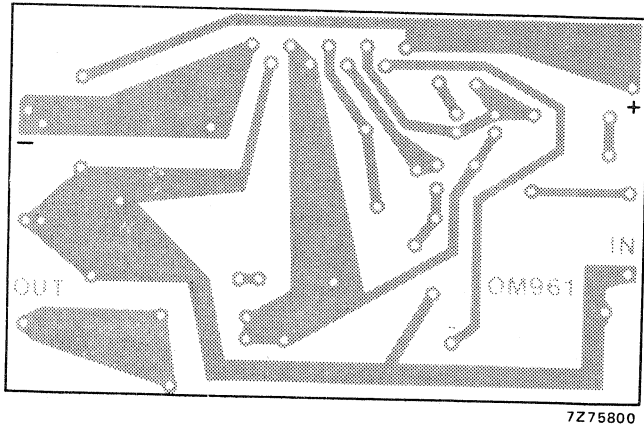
Component side of DIL-version; for component layout see Fig. 6.
